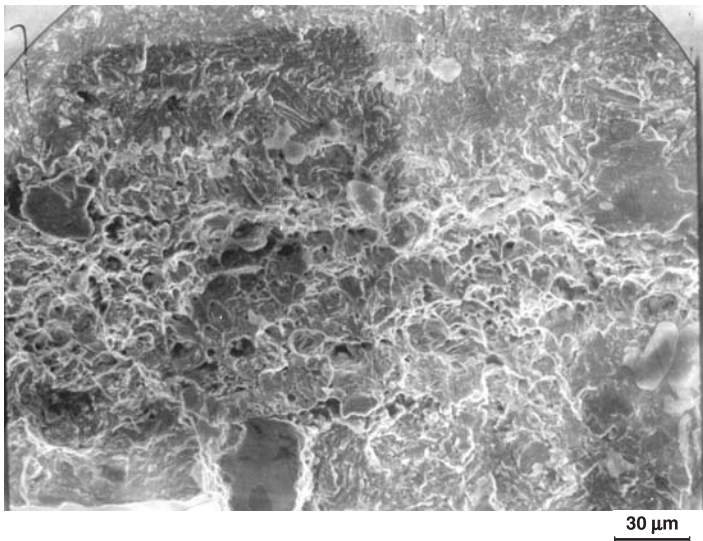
SEM fractograph of region A of Fig. CH1.1, close to the rivet hole, showing tearing mode of fracture
